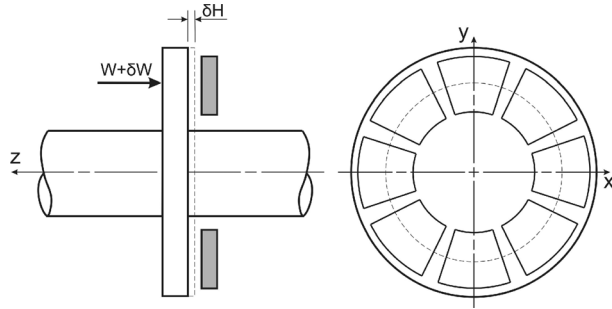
Sketch of translational motion of the rotor of a sector pad thrust bearing
